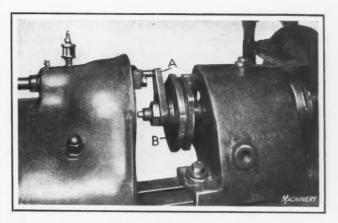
Work-head which permits the Grinder Spindle to rock in Conformity with the Contour of a Master Cam
